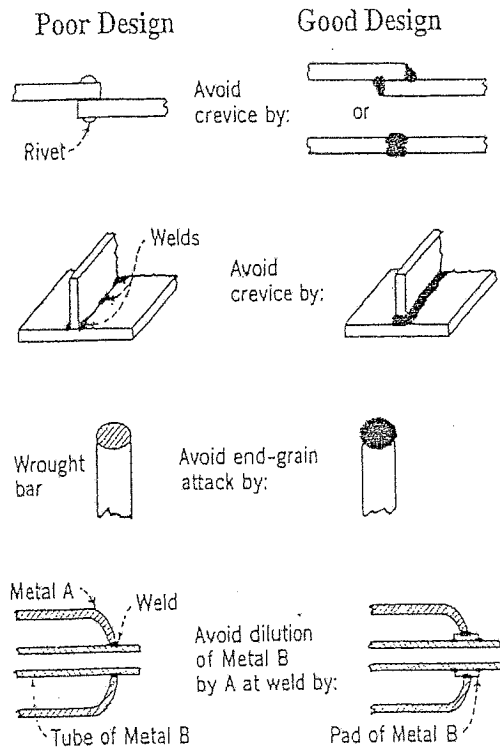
Minimizing corrosion by proper welding of joints and end pieces.
